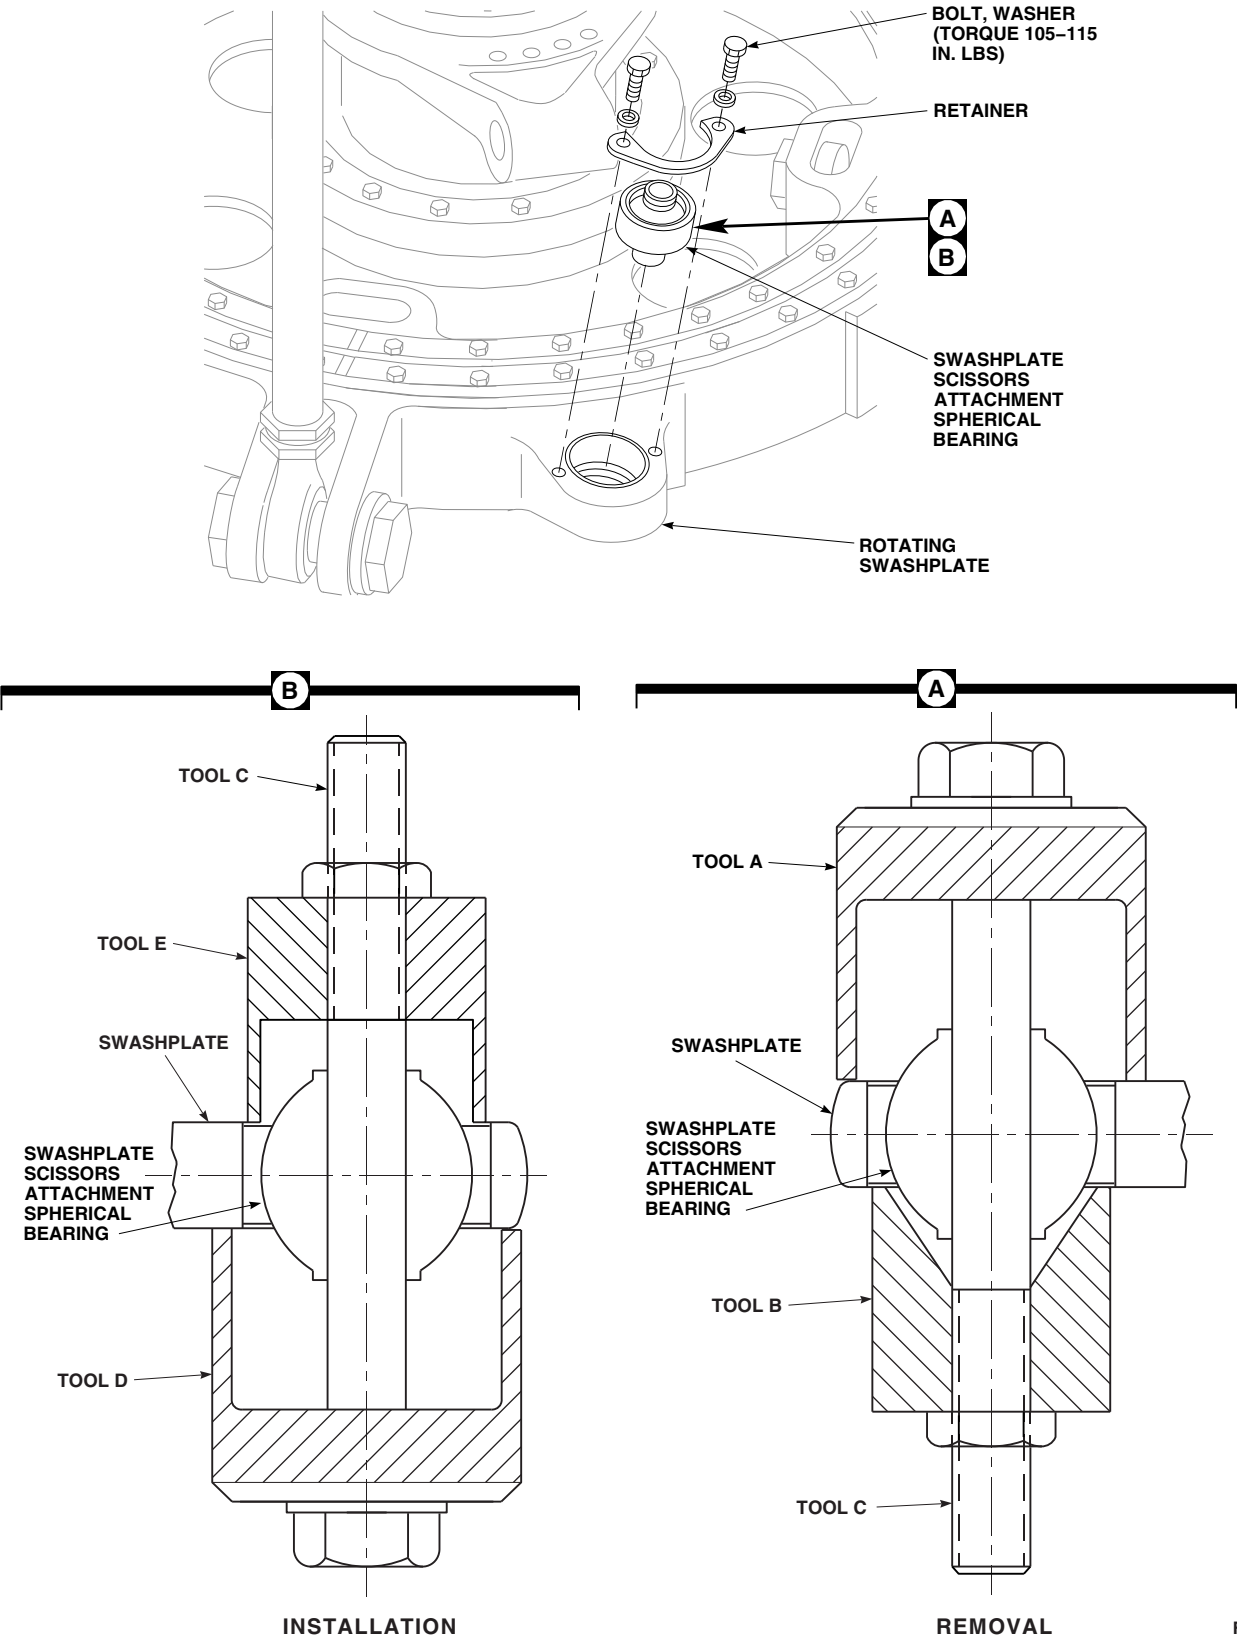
REPLACE SWASHPLATE SCISSORS ATTACHMENT SPHERICAL BEARING
